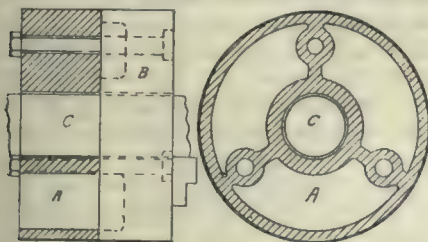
CHUCK EXTENSION PIECE ON BULLARD SINGLE PURPOSE LATHE FOR INSIDE BORE MACHINING.
